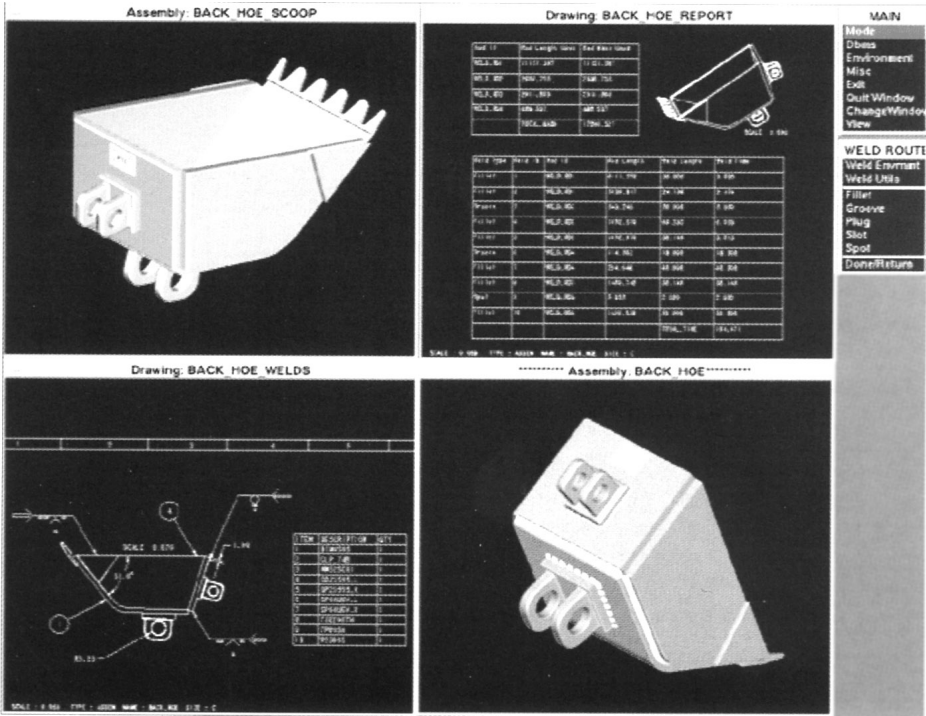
Example of a Weld Design. (System Pro/WELDING, PTC) Reprinted by permission of PTC.
